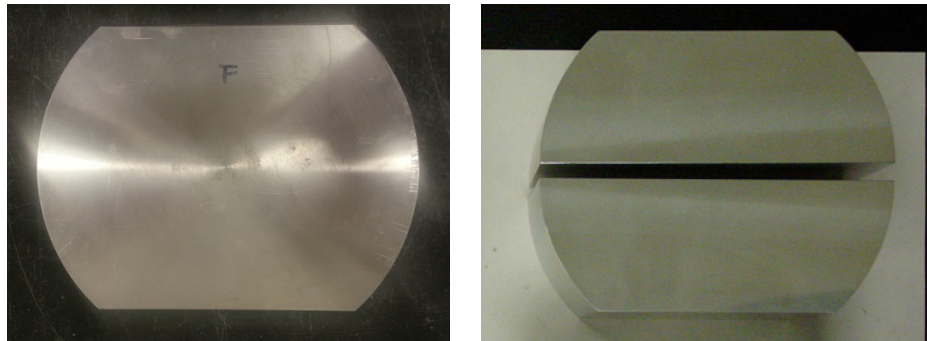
Fabricated aluminum specimens; intact (left) and fractured specimen (right) with an angle of 0° (perpendicular to loading).
